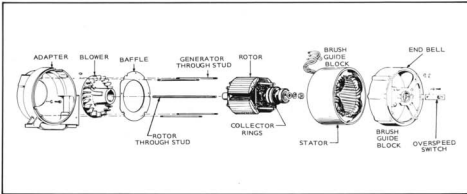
REVOLVING FIELD GENERATOR ASSEMBLY
